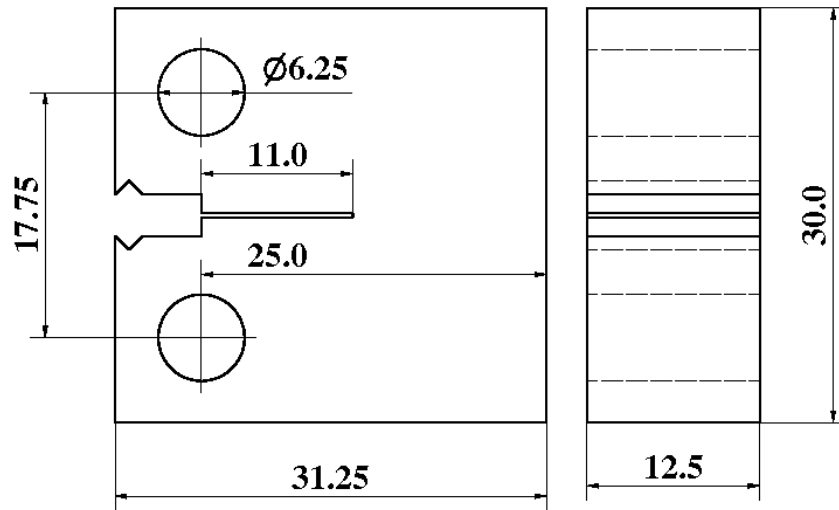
Schematic illustration of C(T) test specimen (dimensions in mm).
